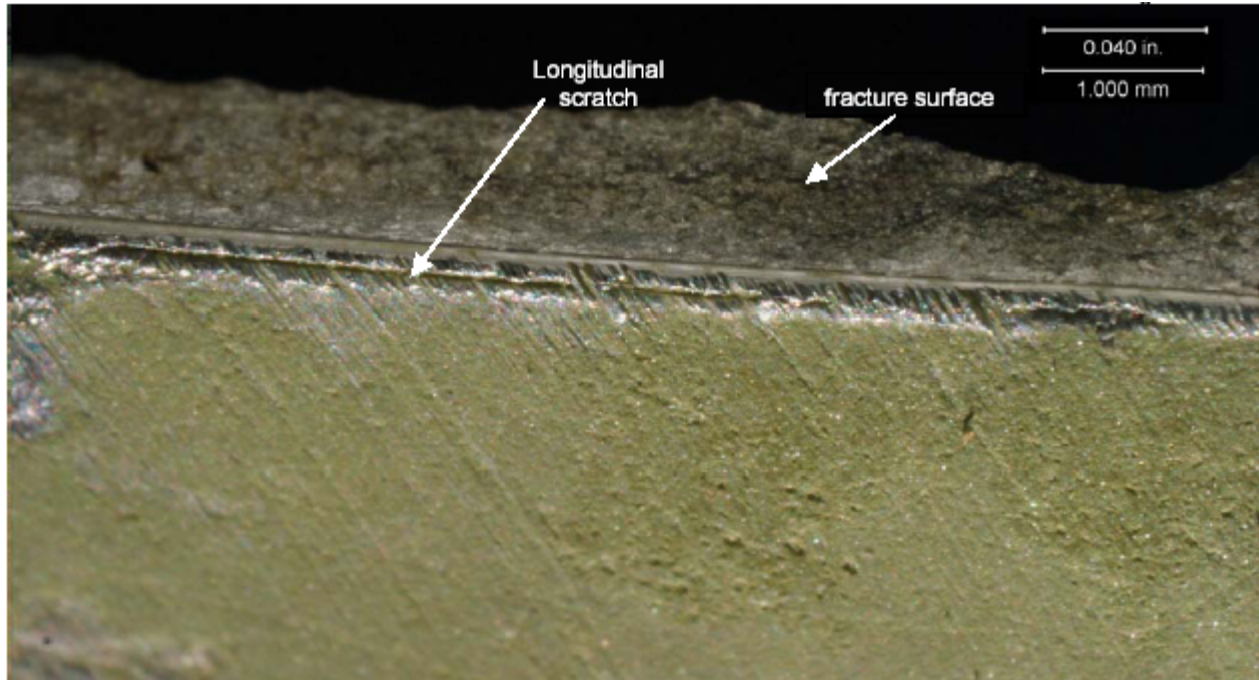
Surface of skin faying with repair doubler near hole 20 showing the longitudinal scratch where fatigue crack initiation occurred from multiple origins. Also note the sanding marks induced during rework of the skin.
